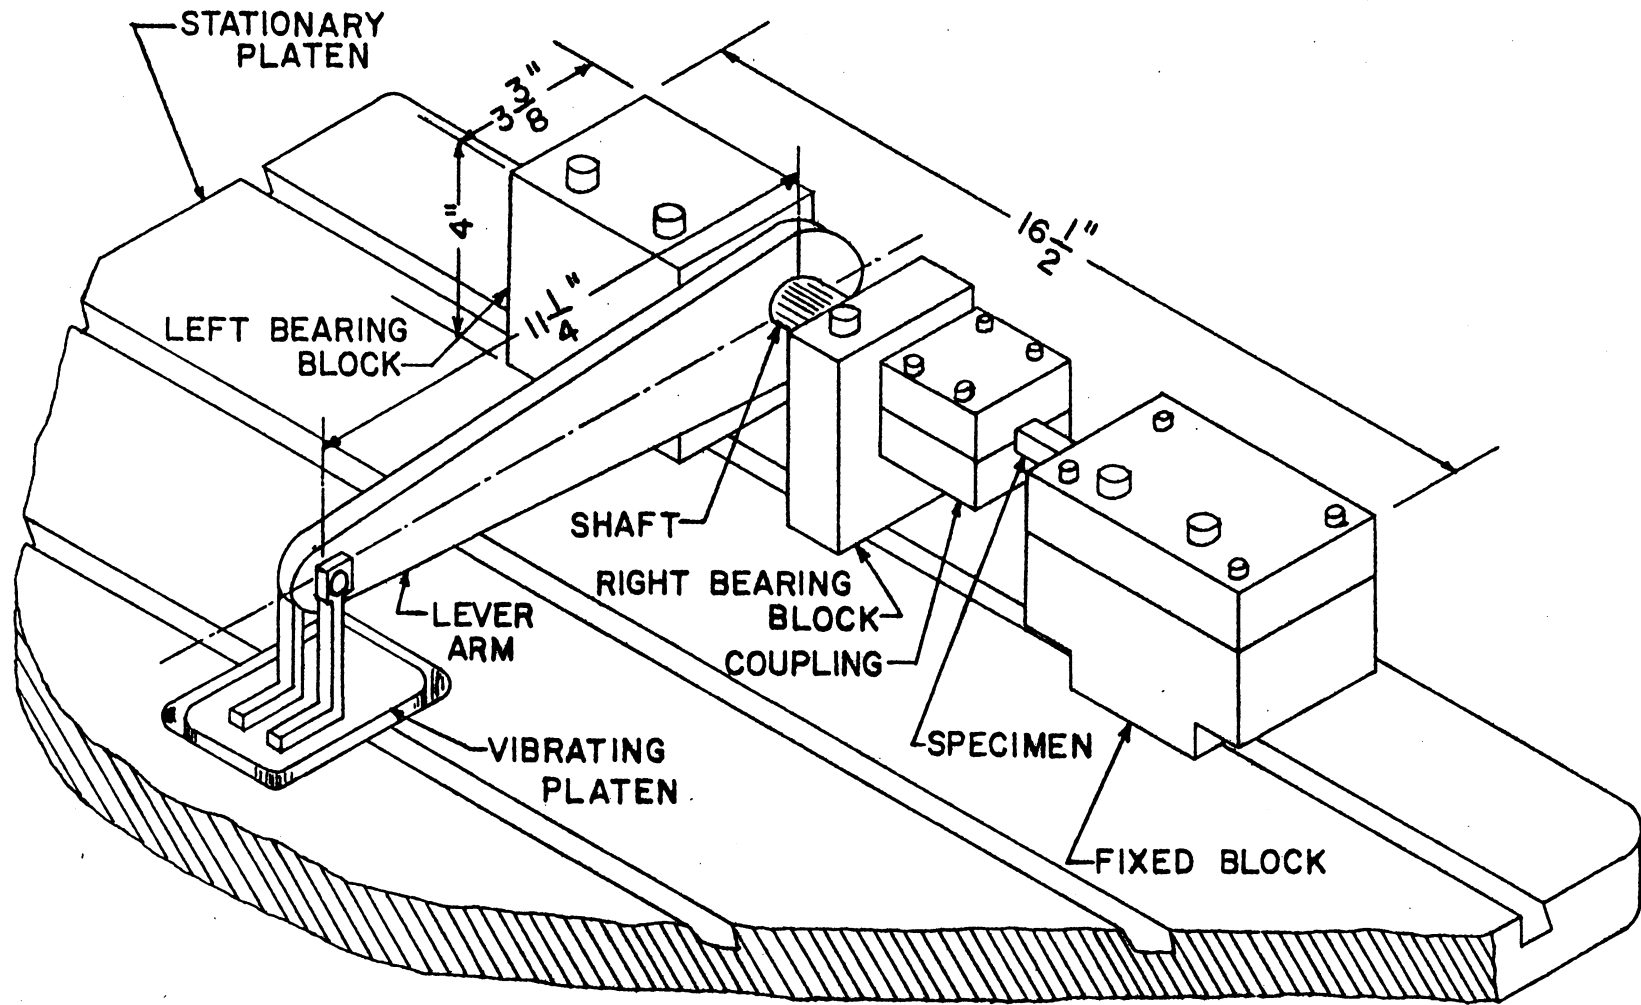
TORSION FIXTURE — COMPONENTS AND DIMENSIONS
